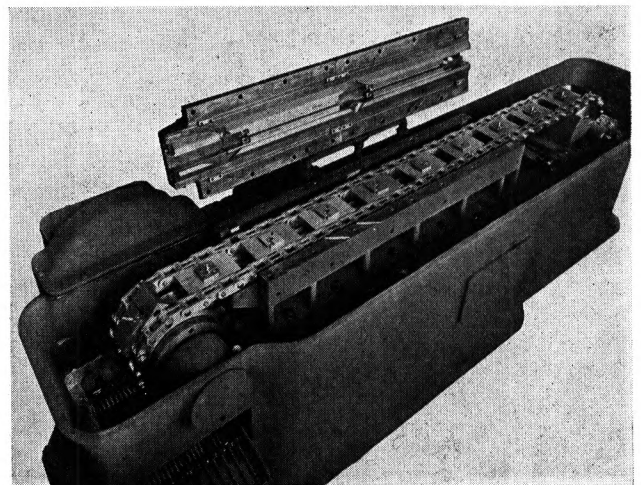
HORIZONTAL, FULLY AUTOMATIC, CONTINUOUS BROACHING MACHINE, DESIGNED FOR HIGH-PRODUCTION WORK RANGING UPWARD OF 1800 PIECES PER HOUR
